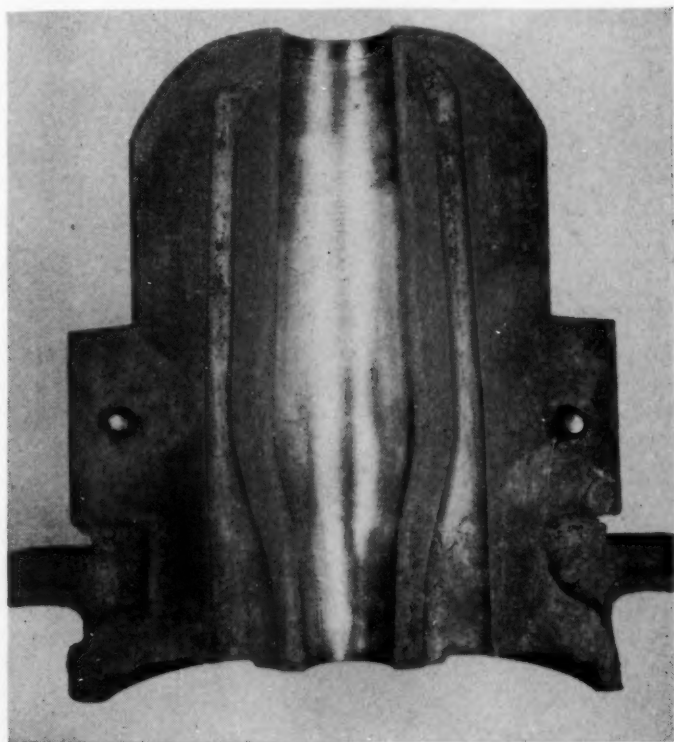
SUCTION BLANK MOLD WHICH HAS BEEN DISCARDED, DUE TO CRACKING.
